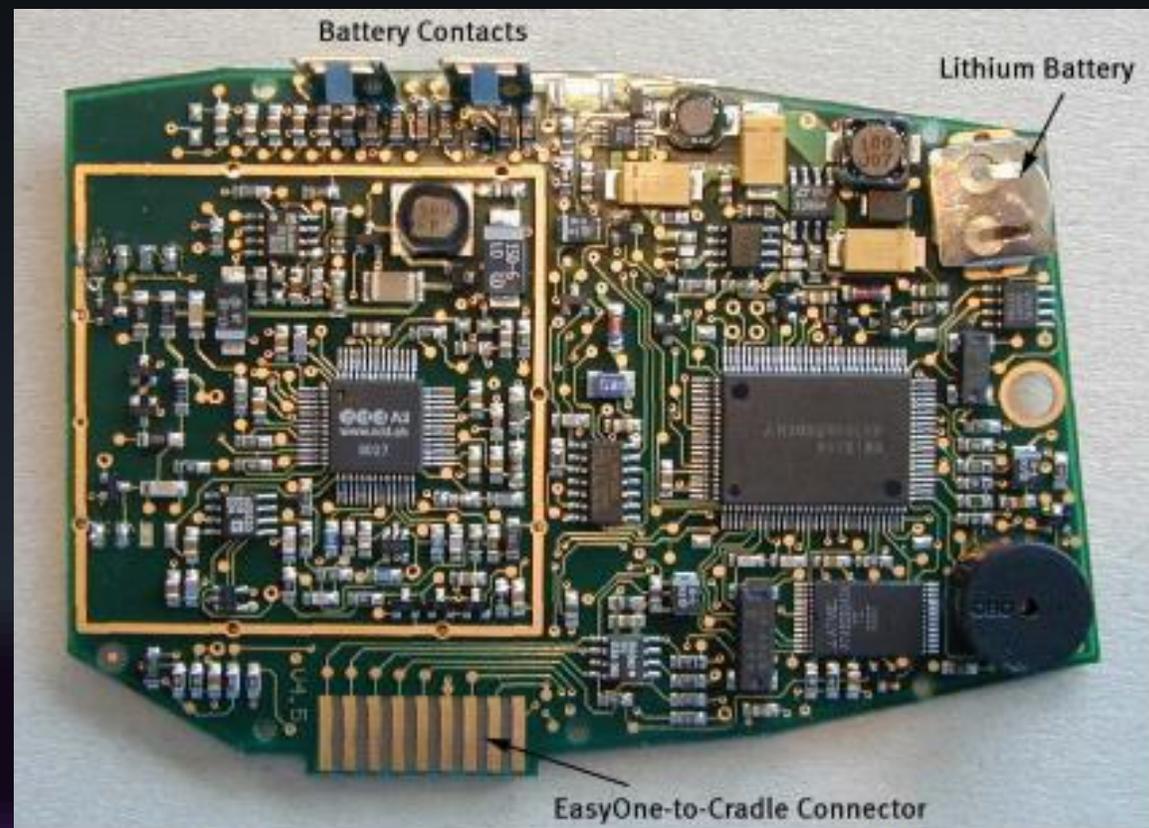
Top view of EasyOne™ PCB (without EMI shielding)
